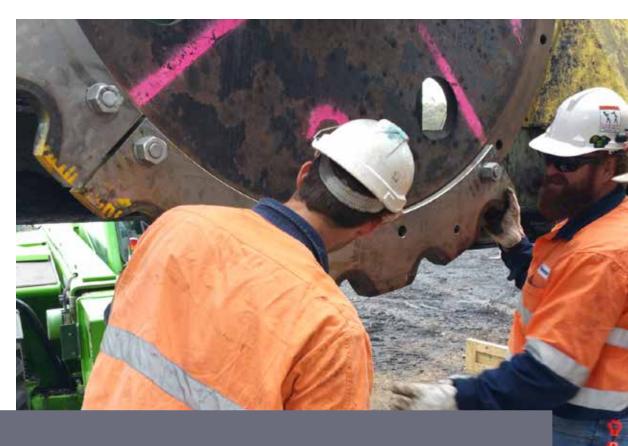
Sprocket with 3-part sprocket wheel and lightening holes
